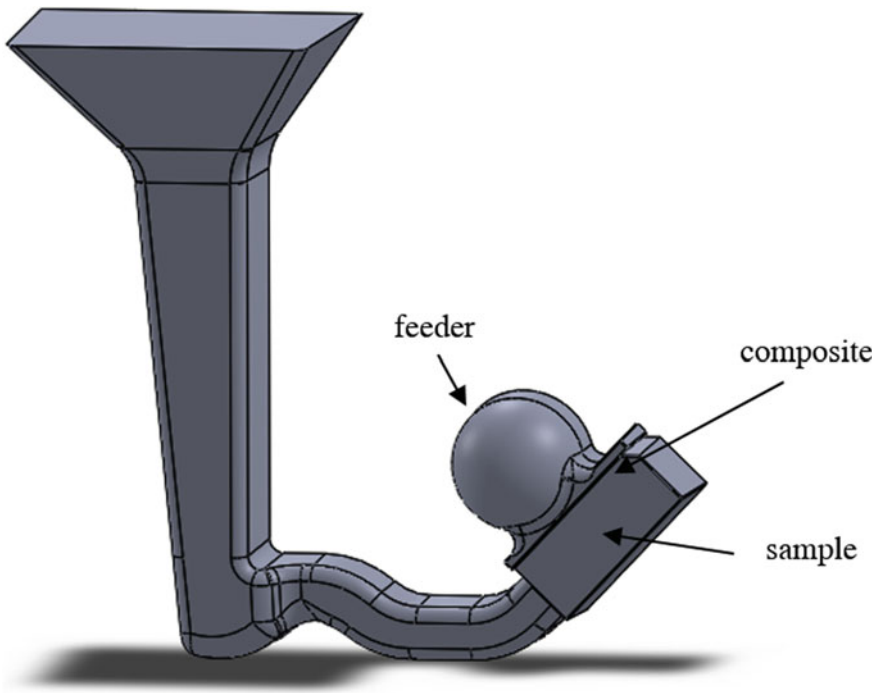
CAD model of the infiltration casting with the wear sample below the spherical feeder
